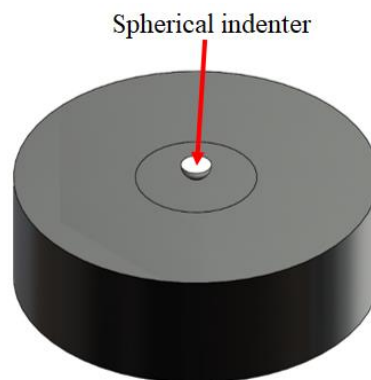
3D general CAD redraw demonstrating the FEM analysis
